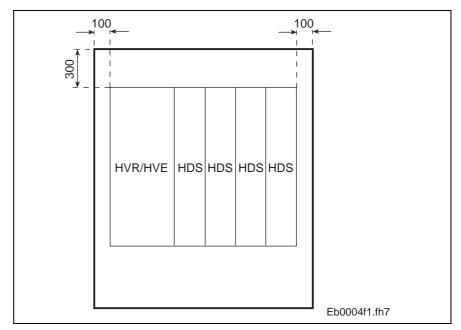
Control cabinet (uncooled, unventilated) with drive package
